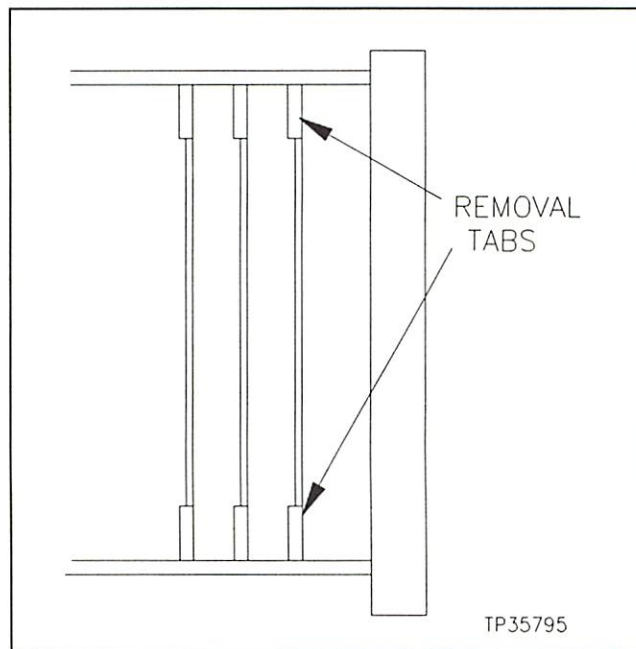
shows the card removal tabs. Remove the cards by pulling the latches toward you and gently sliding the card out of the cage.
